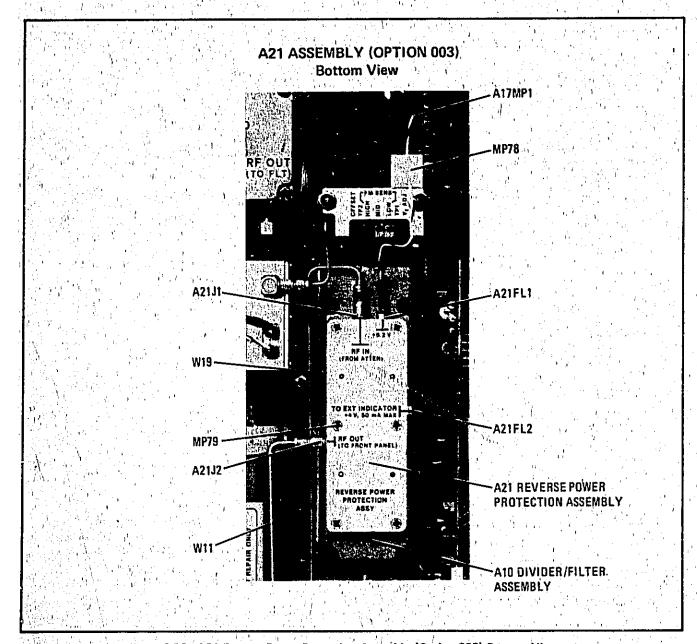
A21 Reverse Power Protection Assembly (Option 003) Bottom View
